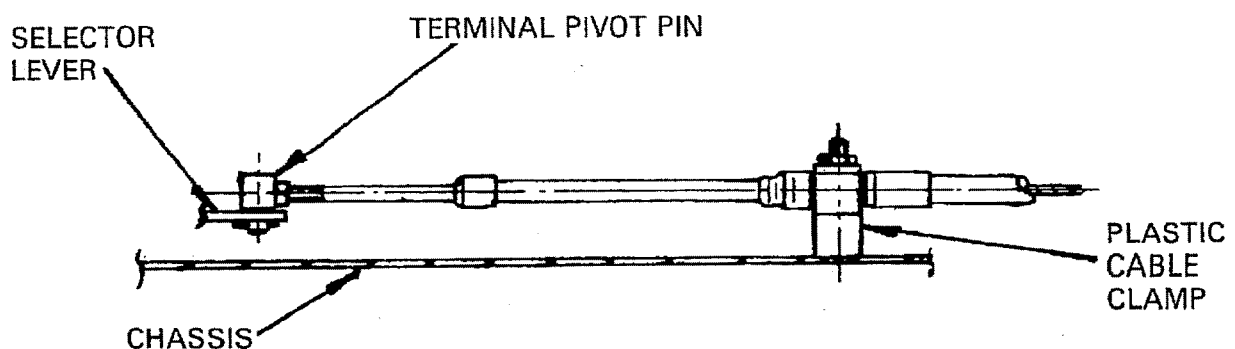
SELECTOR LEVER CABLE MOUNTING
